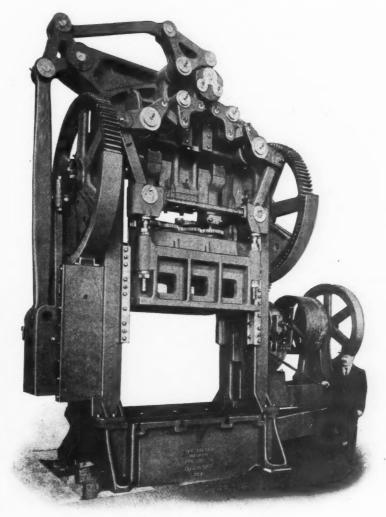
Double-crank Double-action Toledo Toggle Drawing Press
